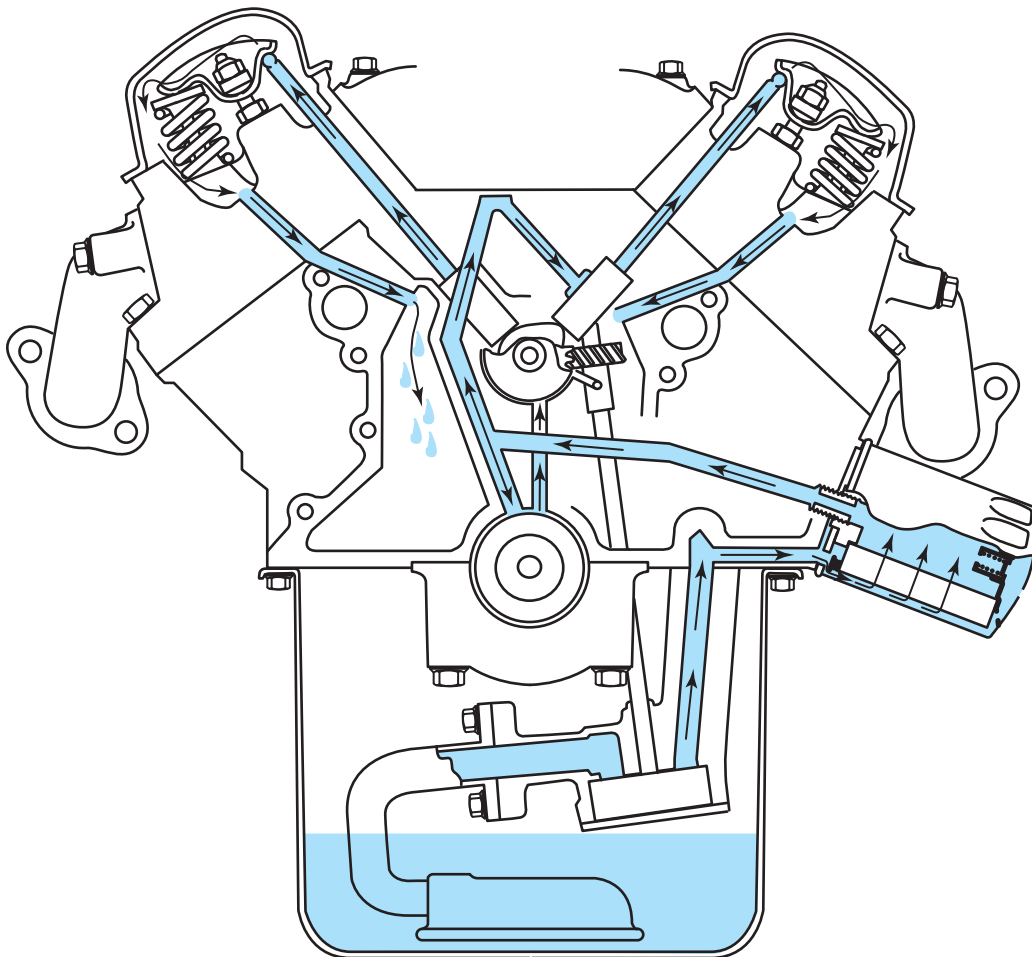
A typical lubrication system, showing the oil pan, oil pump, oil filter, and oil passages.
